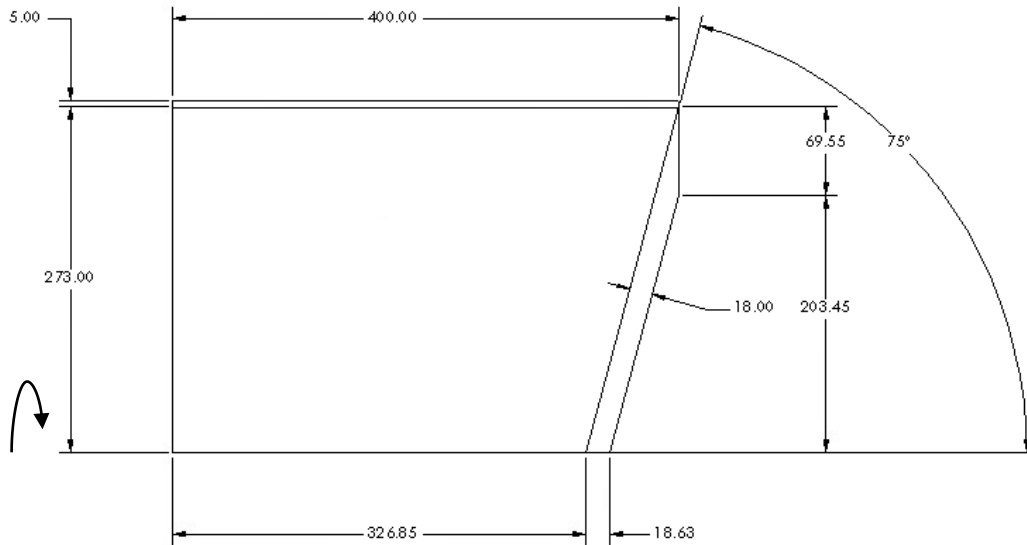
2D Drawing of 143.35 kg TNT Shaped Charge with 18.0 mm Liner Thickness (Dimensions are in mm).
